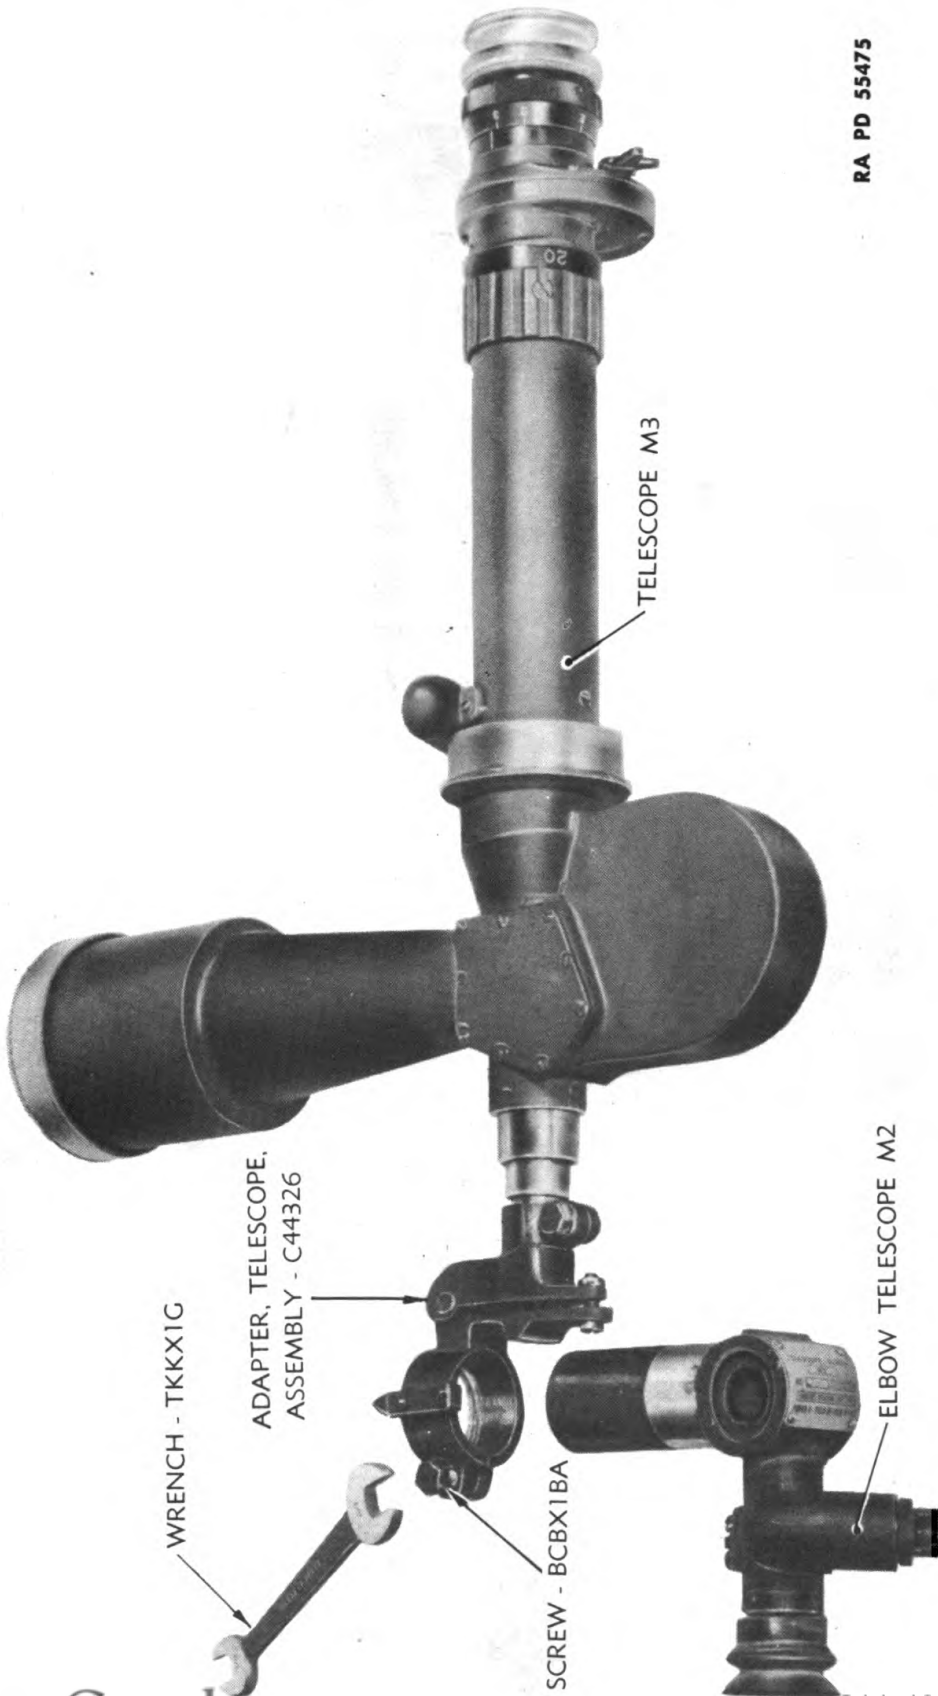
Elbow Telescope M2—Removal From Telescope Adapter Assembly
